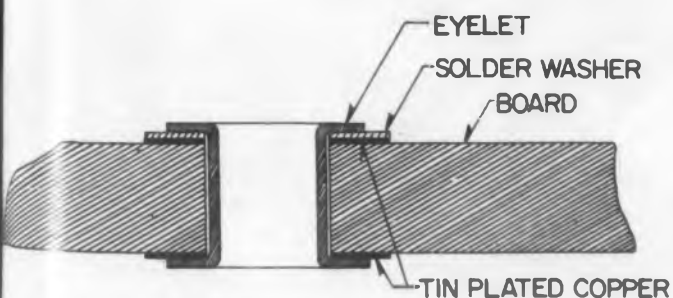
Cross-section of component hole showing eyelet and washer installed.
